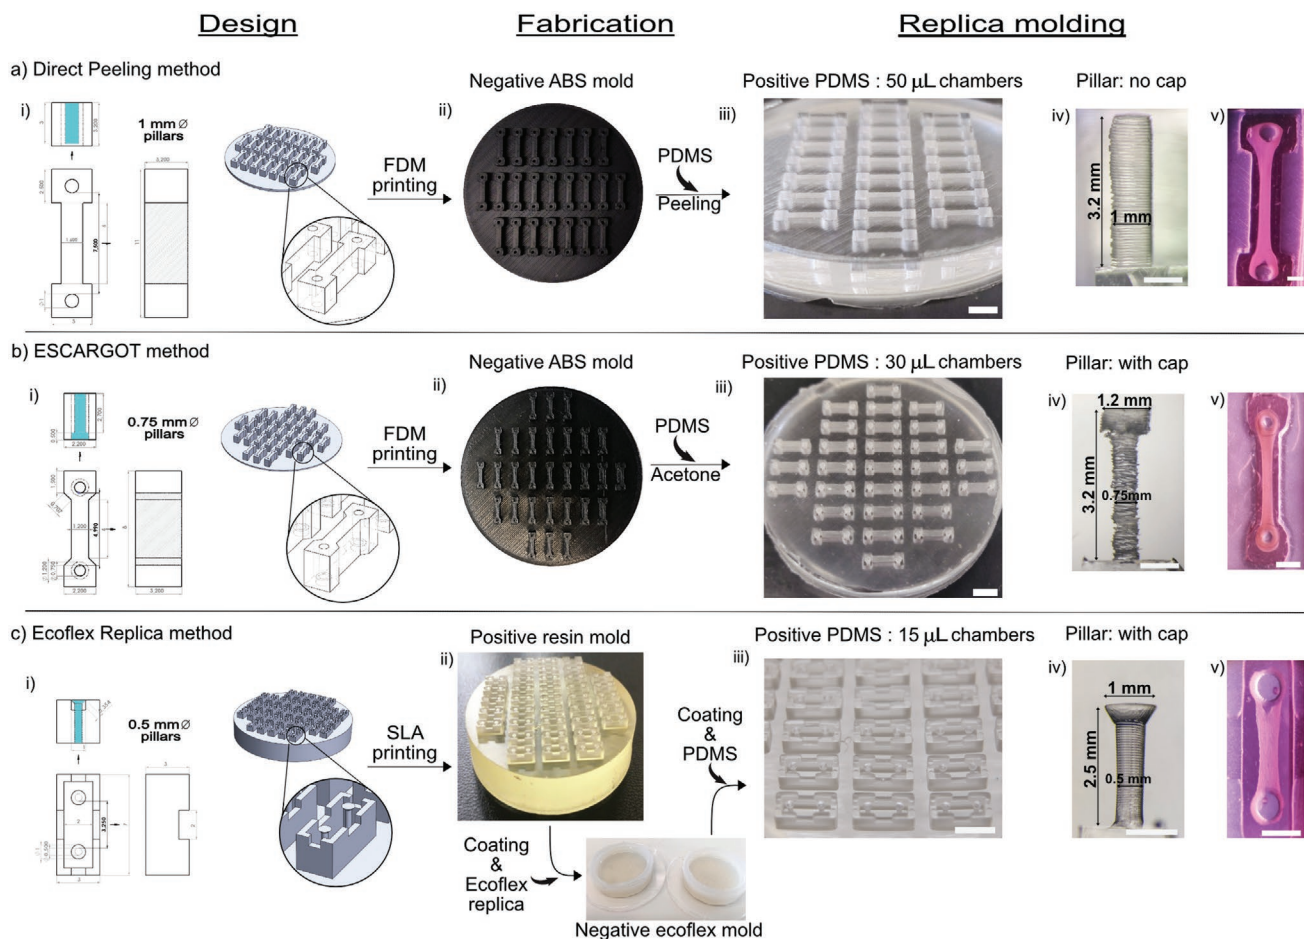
Fabrication methods of the 3D culture chambers for tissue engineered skeletal muscles. a) Direct Peeling method. Technical drawing of a single chamber and 3D CAD model of the negative master mold (i), 3D printed ABS negative master mold through fused deposition modeling (FDM) printing (ii), detail of a PDMS positive replica (iii), detail of the pillar (iv). b) ESCARGOT method. The same process of the Direct Peeling method from design to 3D printed mold is shared (i-ii), detail of PDMS replica (iii) and of a T-shaped pillar with cap, obtained after the dissolution of the ABS master mold (iv). c) Ecoflex Replica method. Technical drawing of a single chamber and 3D CAD model of the positive master mold (i), 3D printed resin positive master mold through stereolithography (SLA) printing (top), negative molds in form of replicas made of Ecoflex (bottom), detail of a PDMS positive replica (iii) and a T-shaped pillar provided with conical cap (iv). a–c) Examples of tissue engineered skeletal muscles within the three different PDMS chambers (v). Scale bars: a–c) 5 mm (iii), 1 mm (iv, v).
